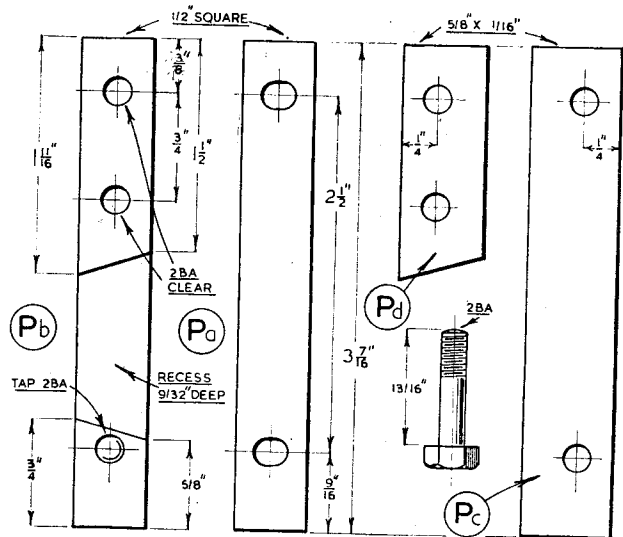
Pa and Pb the right- and left-hand slide-bars; Pc and Pd the corresponding keep-plates
